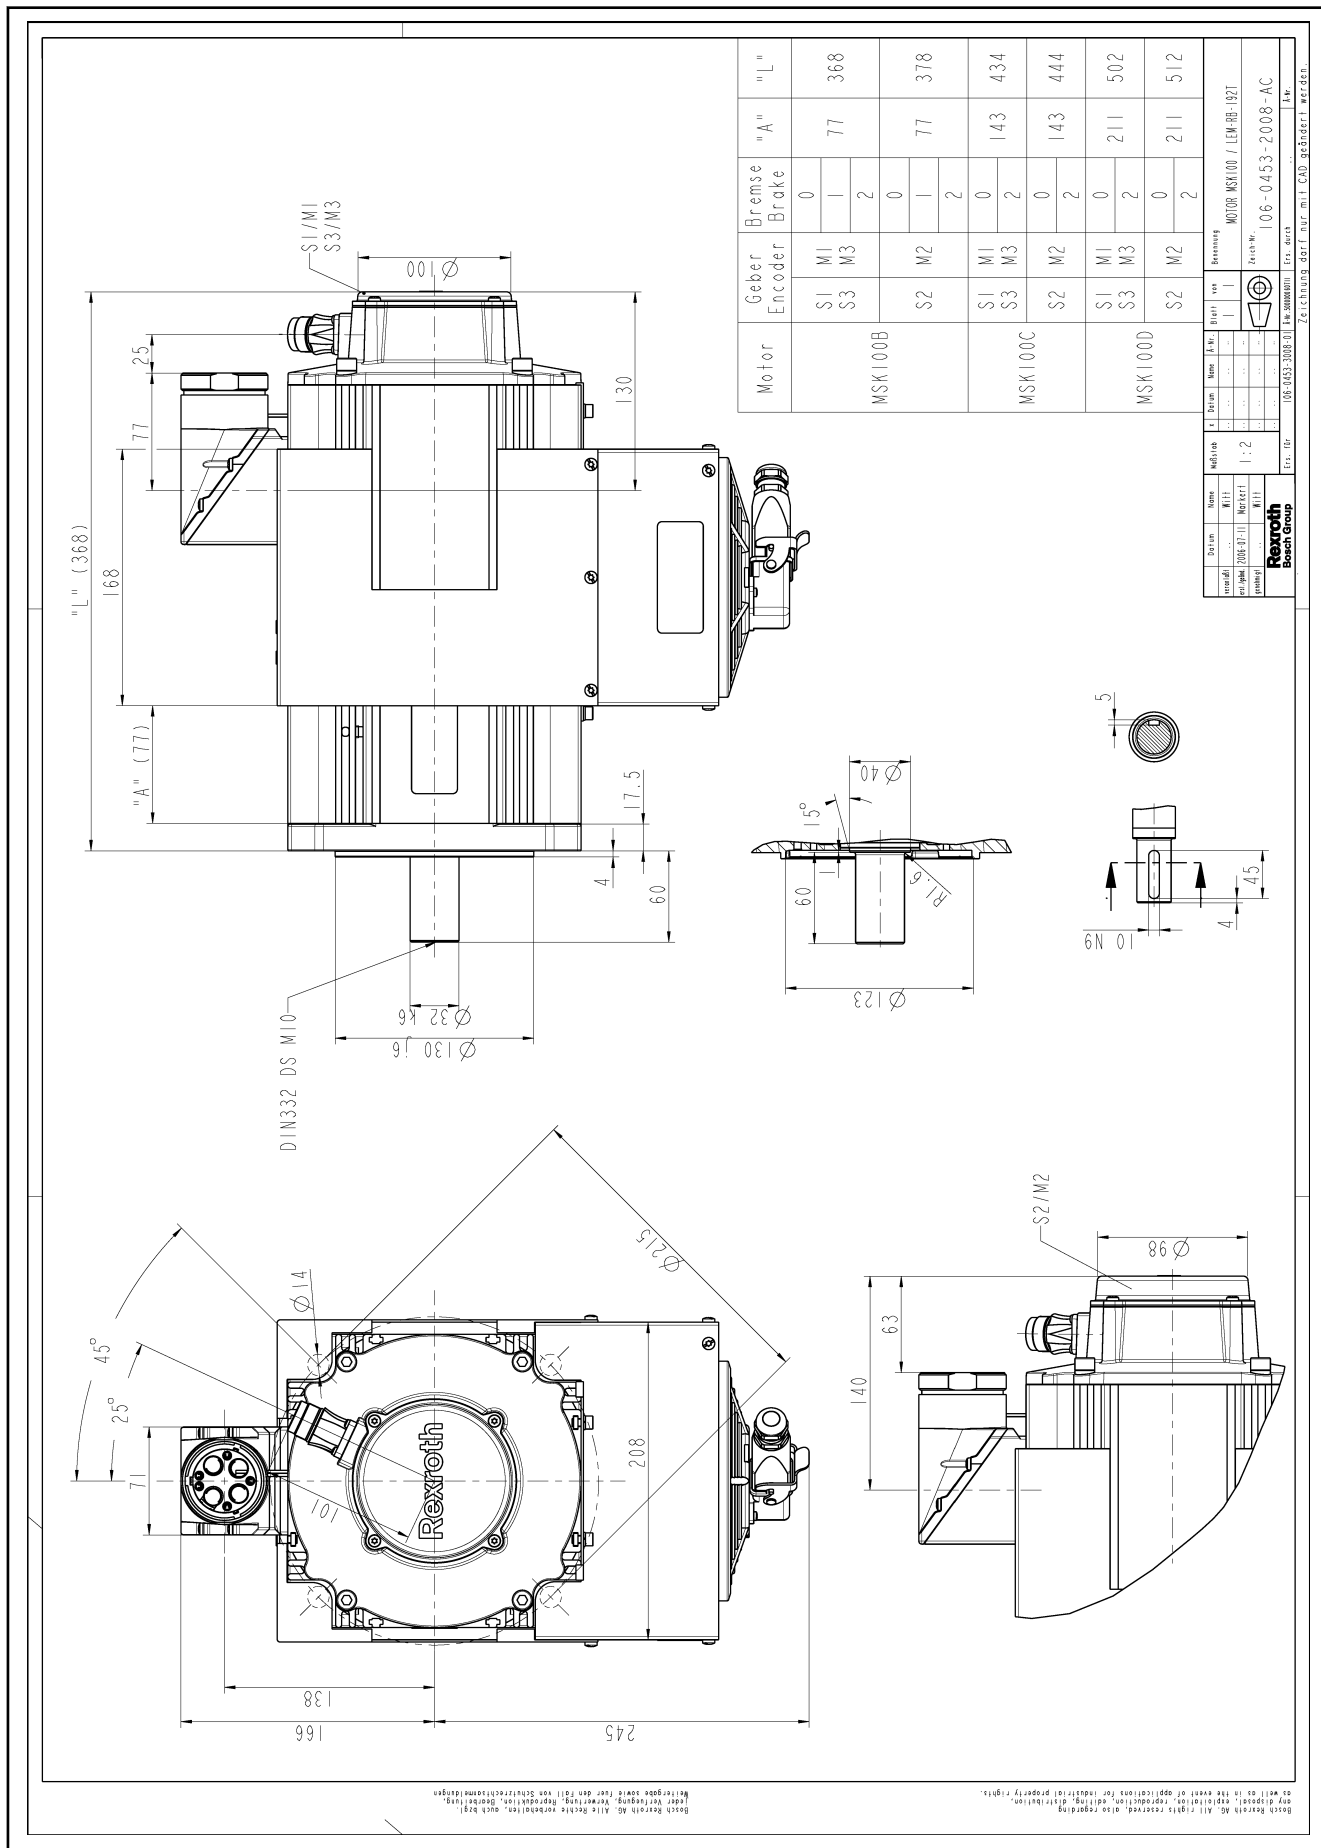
Dimension sheet MSK100 with radial fan unit
